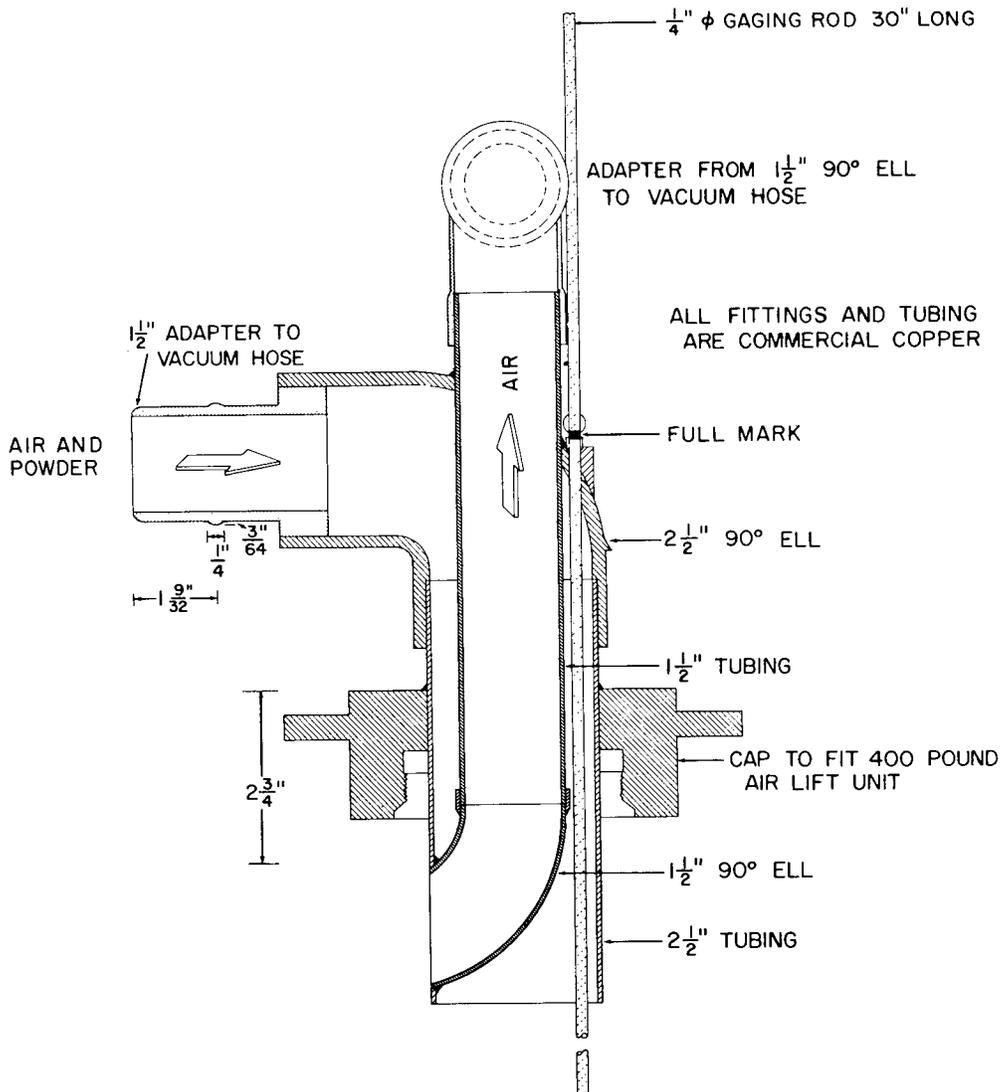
Cross-sectional drawing of original separator head for 400-lb dry chemical airlift sphere filling
